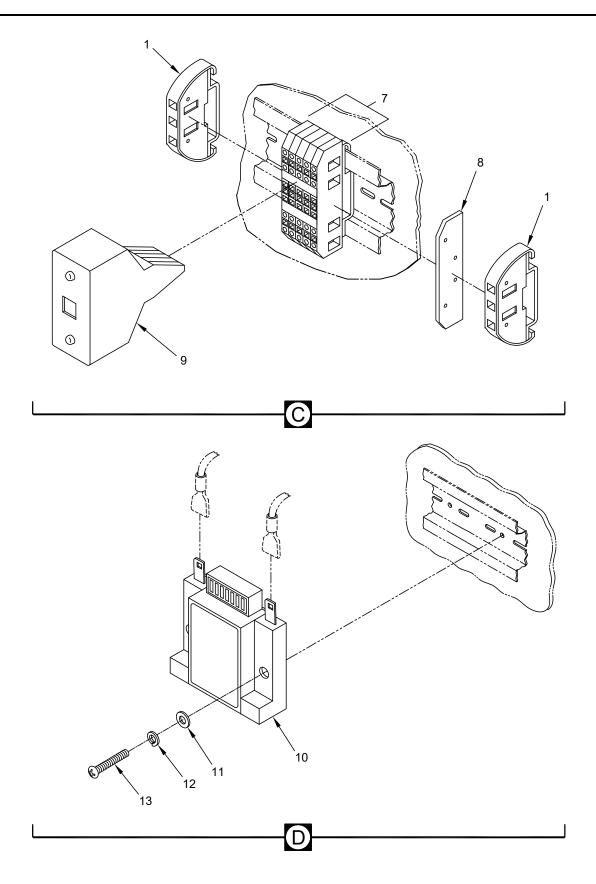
Barrier Panel Assembly (Sheet 3 of 7).
